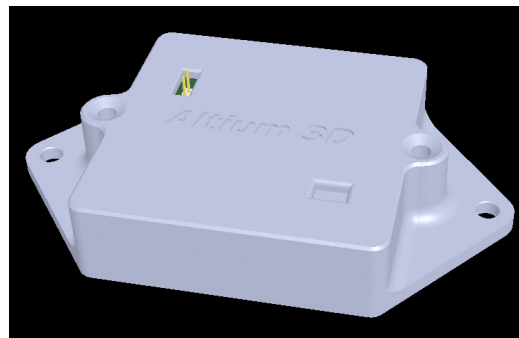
Multivibrator PCB fully assembled into two part housing assembly.
